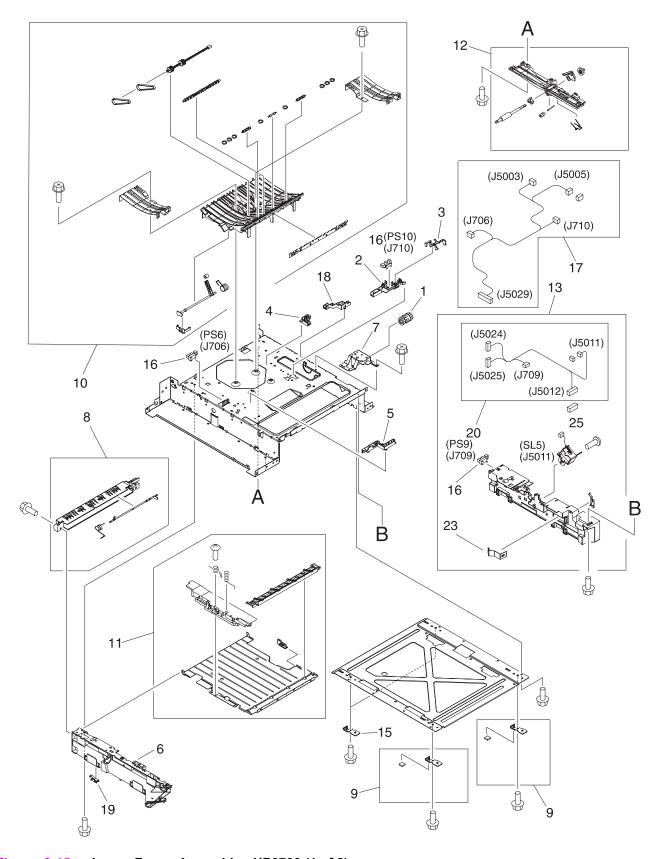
Lower Frame Assembly - HP3700 (1 of 2)
